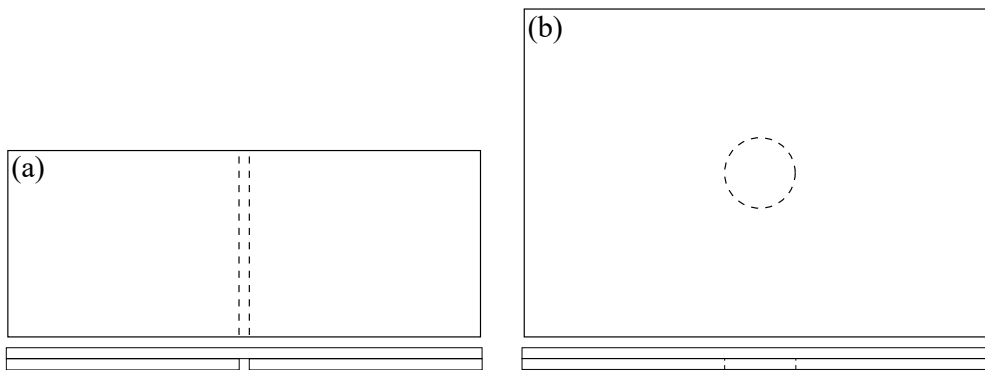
Schematic of the different blank/blank carrier assemblies with a blank carrier with (a) two half-sheets (*split blank carrier*) or (b) a central hole with a diameter of 5 to 30 mm (*pierced blank carrier*).
